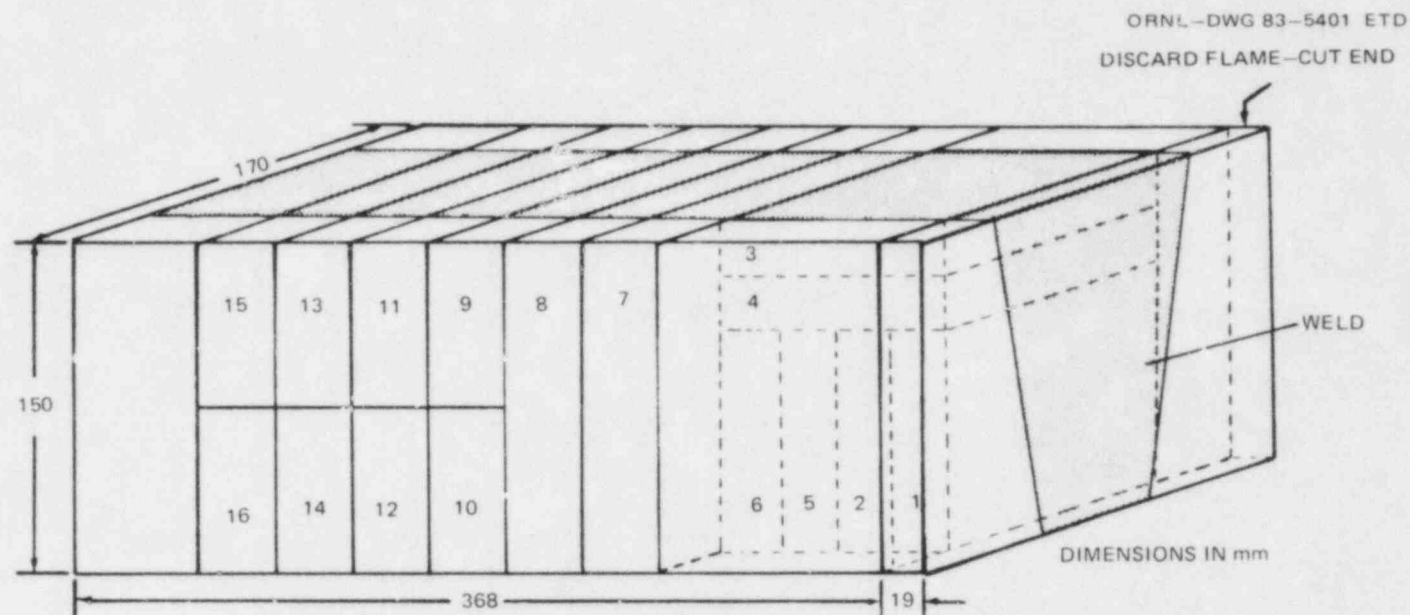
Cutting pattern used to obtain crack-arrest specimens from low-upper-shelf energy weld piece V8A-D.
